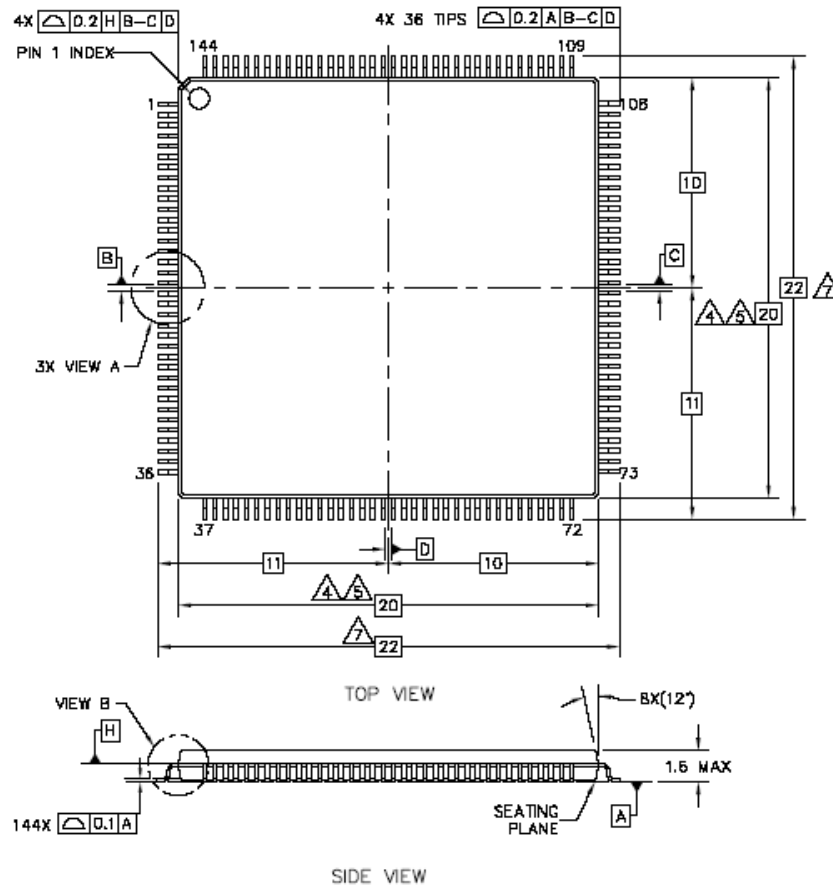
144 LQFP package mechanical drawing (1 of 2)
